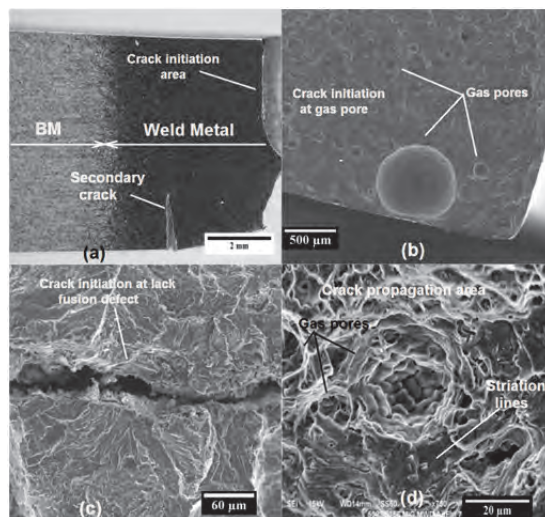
Typical fatigue fractures in 5083 welds (a) crack initiation in the weld metal; (b) crack initiation associated with a large gas pore; (c) crack initiation at a lack-of-fusion type defect; (d) crack propagation associated with gas pores.
